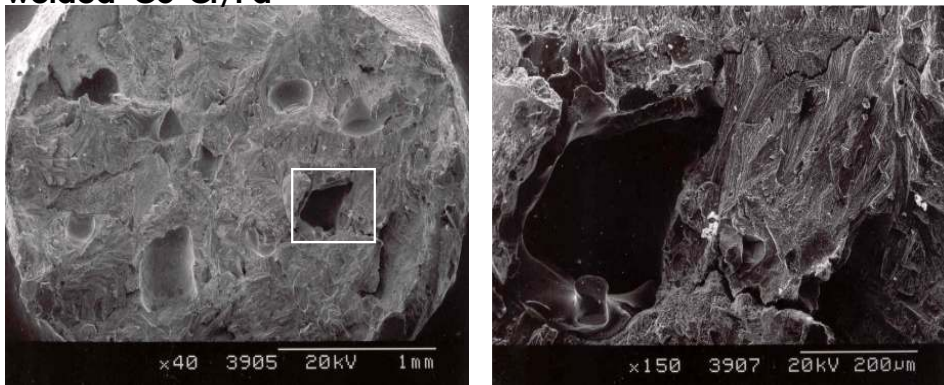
Left, low magnification SEM fractography of laser welded Co-Cr/ Palladium specimen. Complete fusion at the center of the specimen together with some porosity. Right, Features of fracture showed more brittle characteristics.
